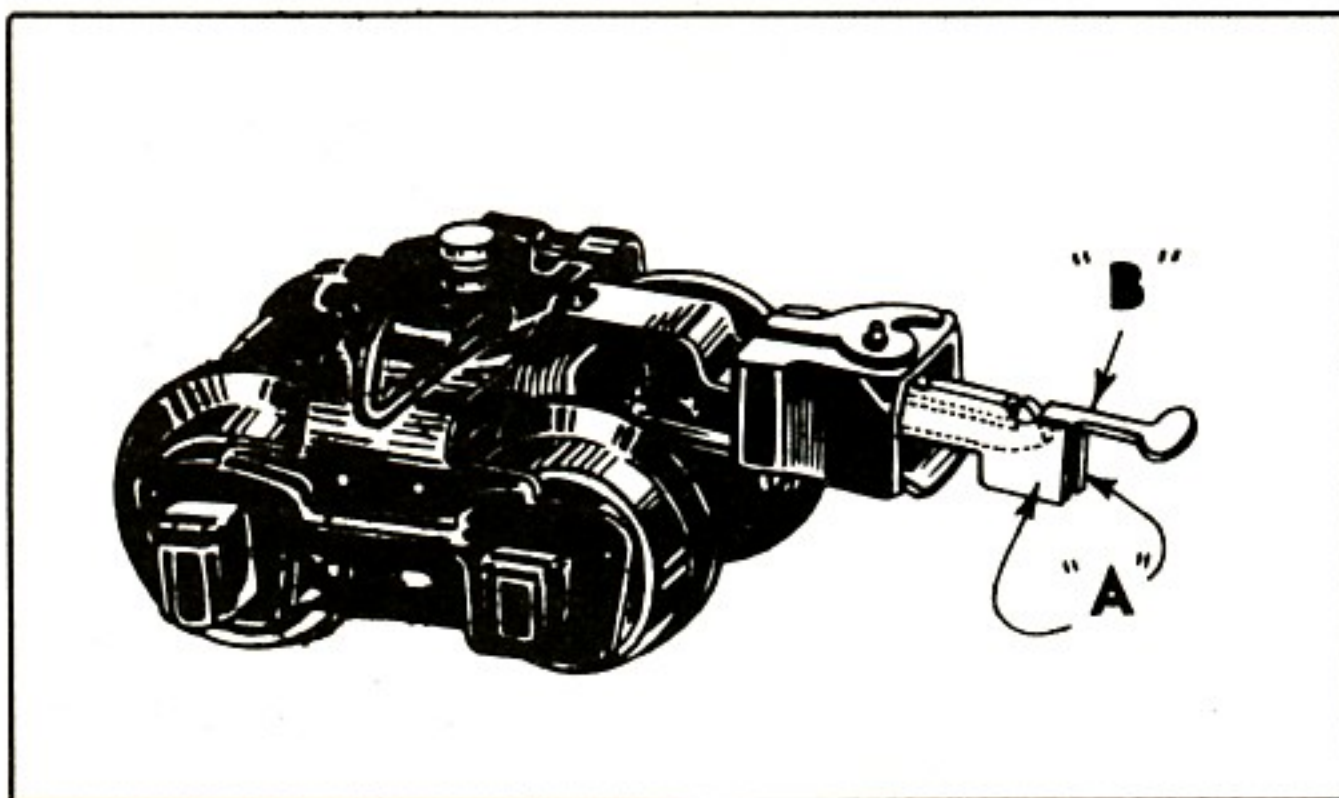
Old Style 'TT' Truck equipped with Model 'A' TT-100 Coupling Adapter.
